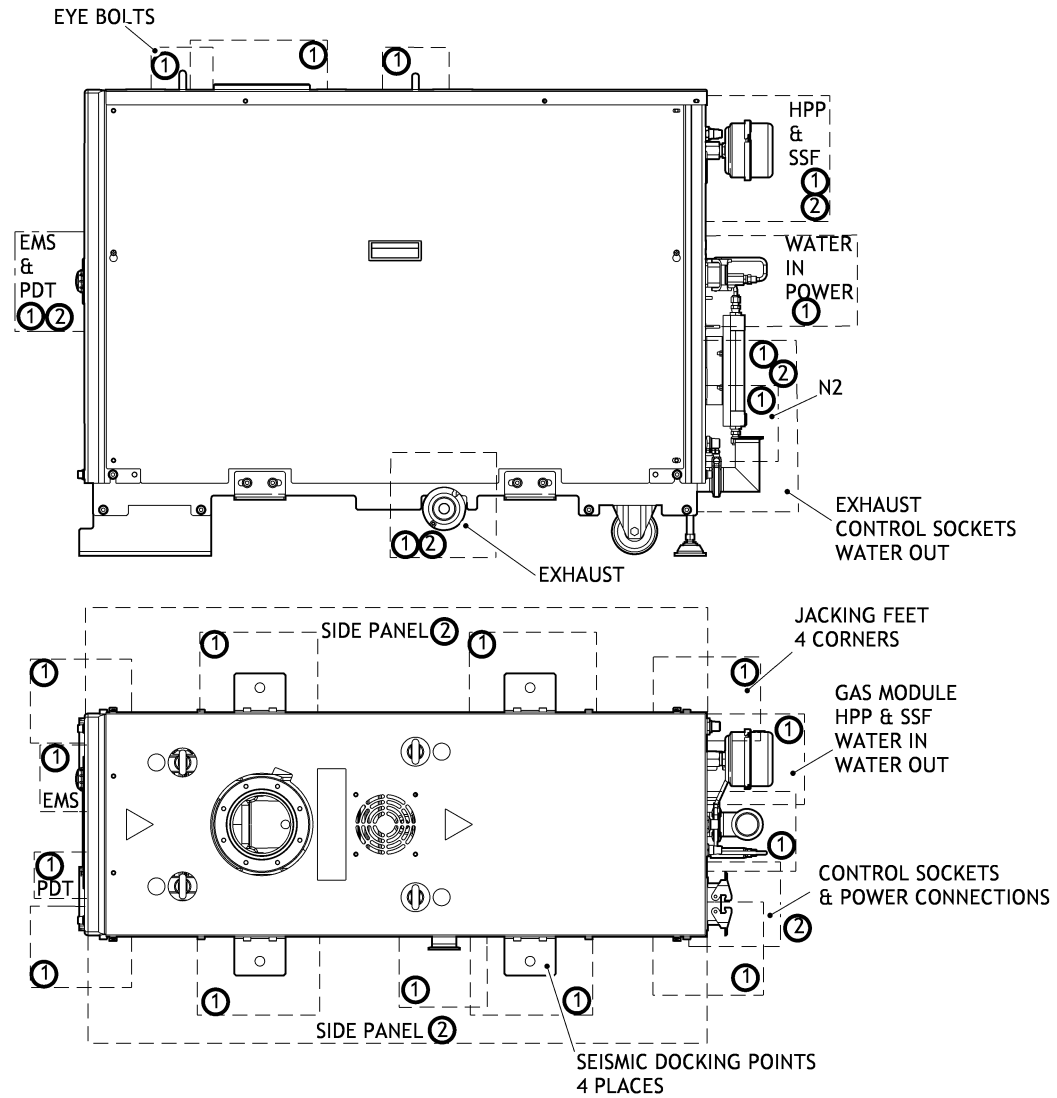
GXS160/1750 installation drawing (Sheet 4)
